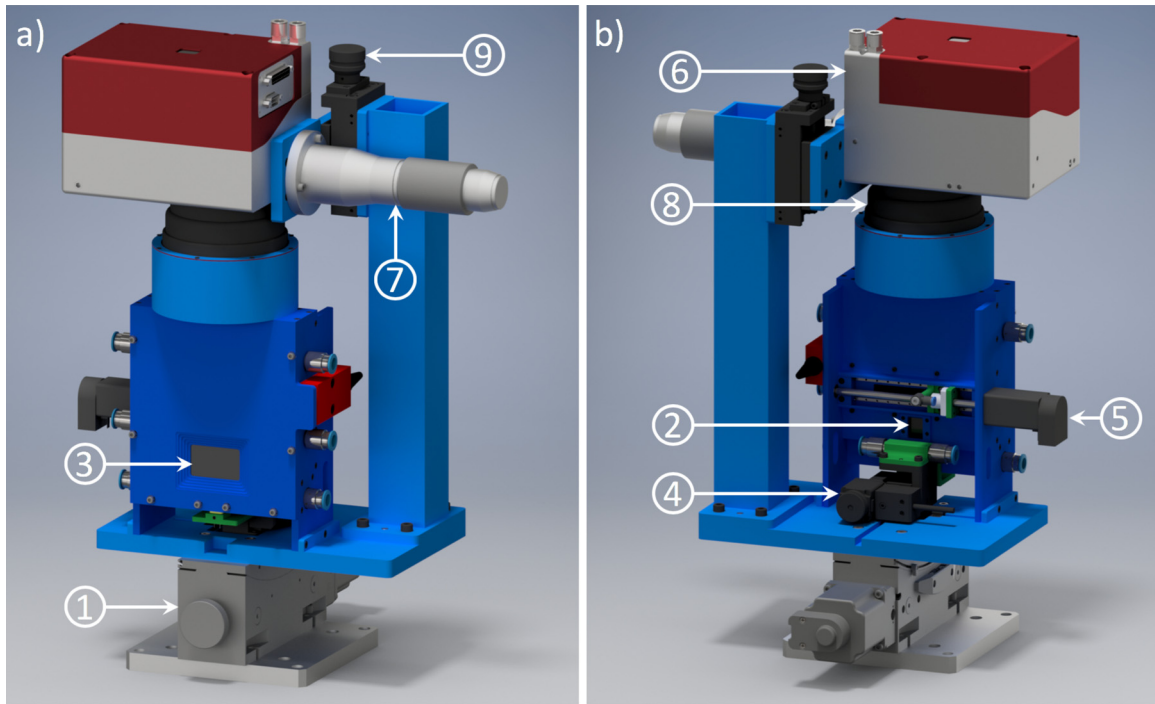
Rendered 3D model of the MiniSLM with front view (a) and back view (b). 1) tilt stage, 2) entrance window, 3) exit window, 4) motor build stage, 5) motor recoater, 6) scanning head, 7) laser collimator, 8) F-theta lens, 9) vertical stage to change focal length. More details on the different components are given in the text.
